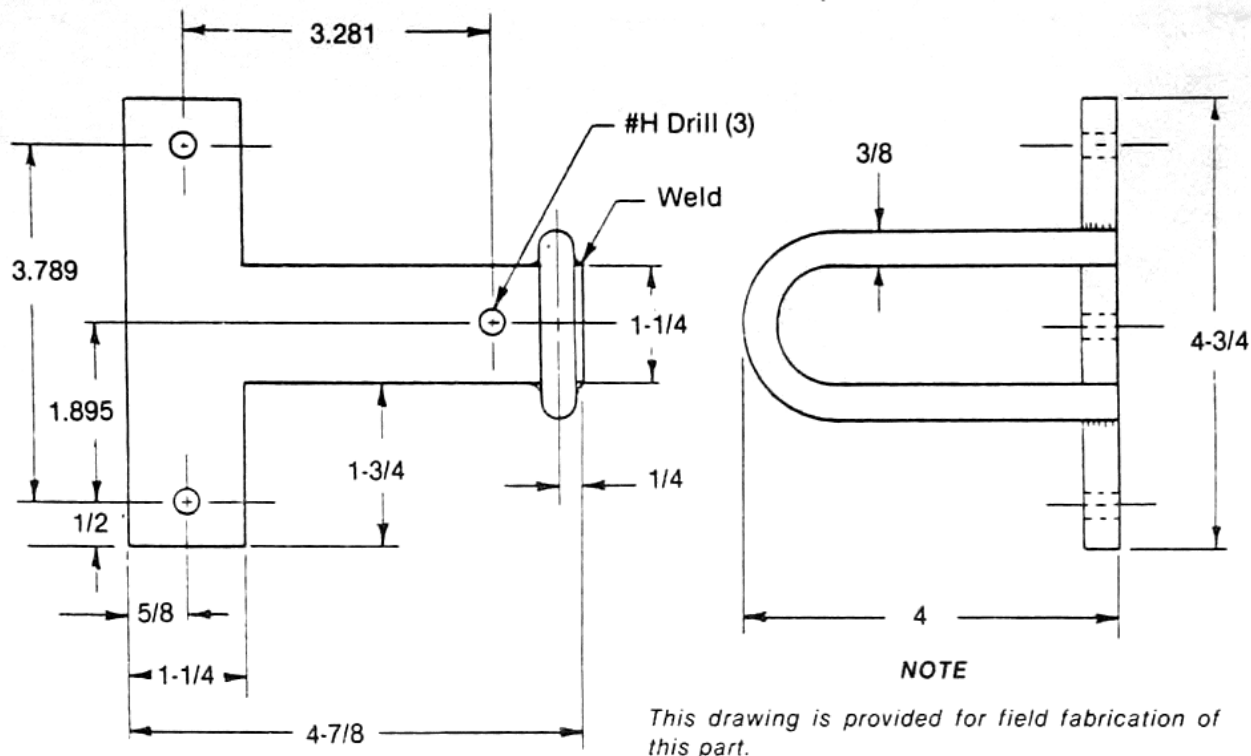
Special Tool ST-6921 Head Lift Bracket
